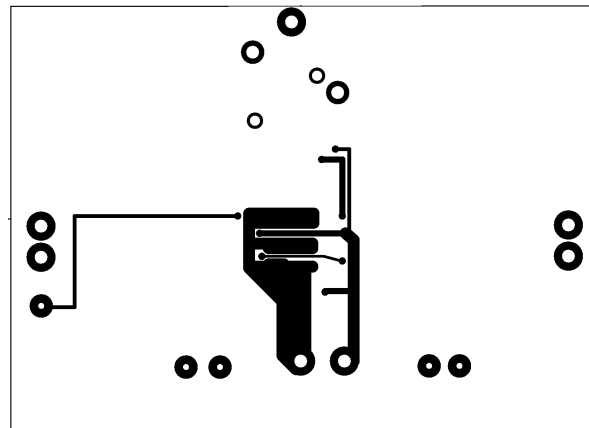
Recommended IAP PC board layout: bottom-side layout
